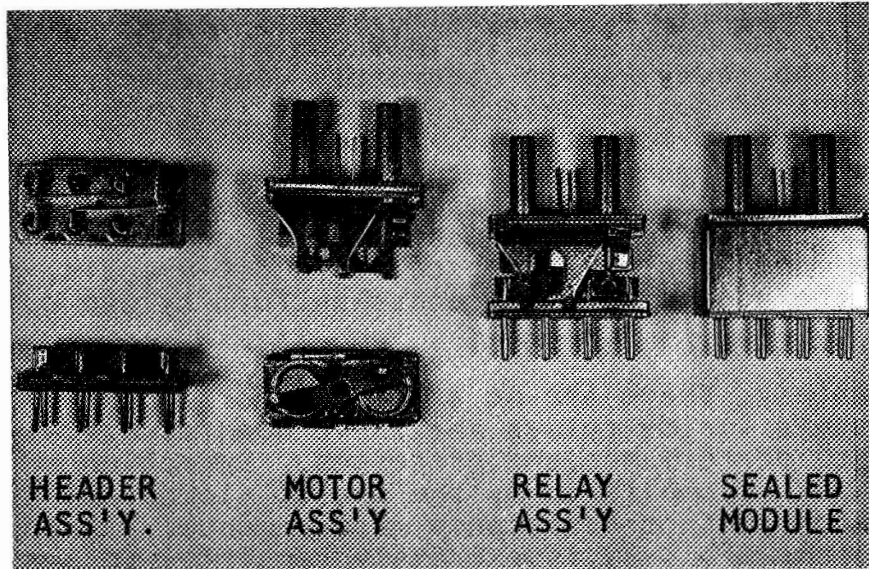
SUPER-J Sealed Switching Module Assembly
